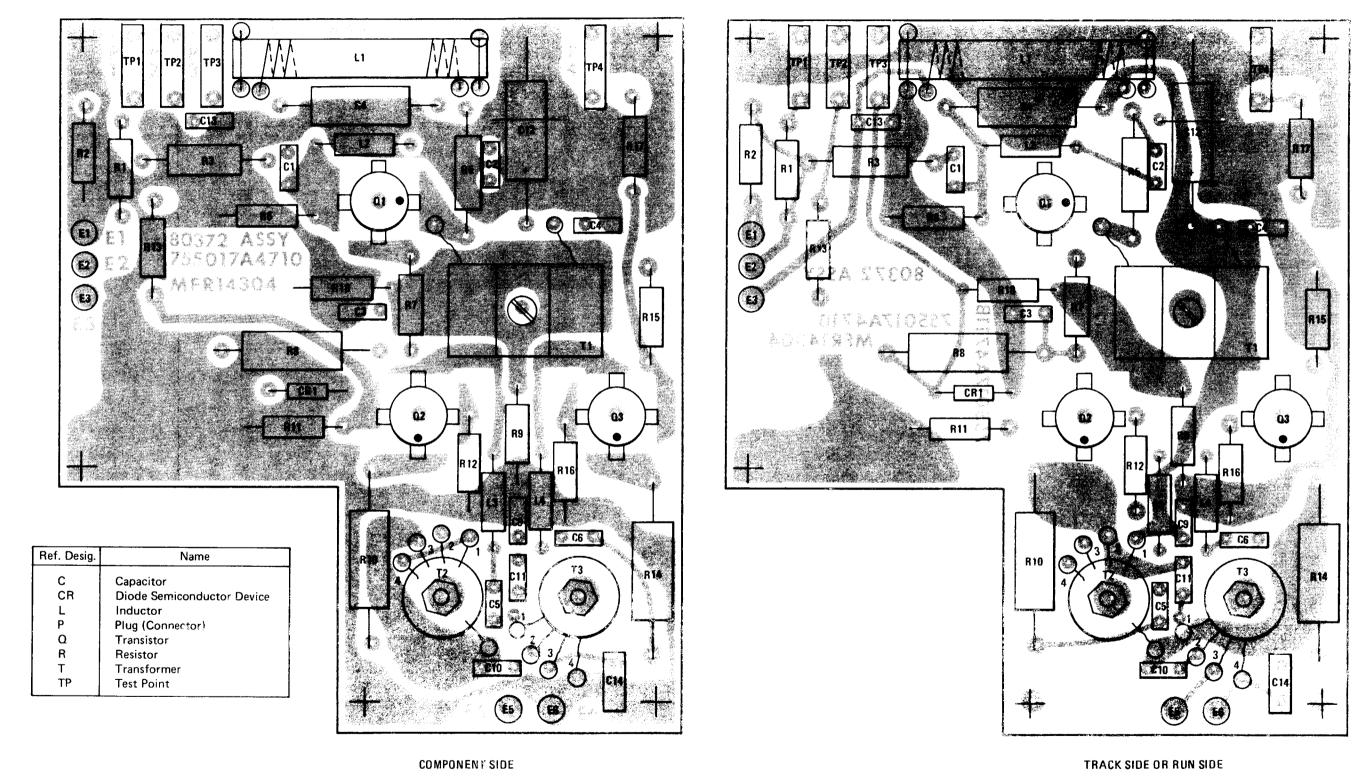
RF Driver Module Assembly 1A11, PN 755017A4700 (Sheet 1 of 2)
